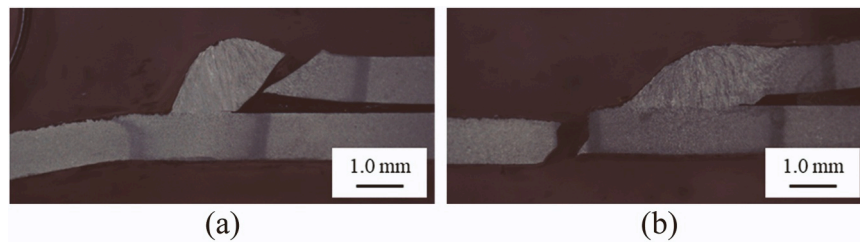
Fractured specimens after tensile-shear test: a) WM fracture (W920, WFS: 5.0 m/min) and b) HAZ fracture (W920, WFS: 7.0 m/min).
